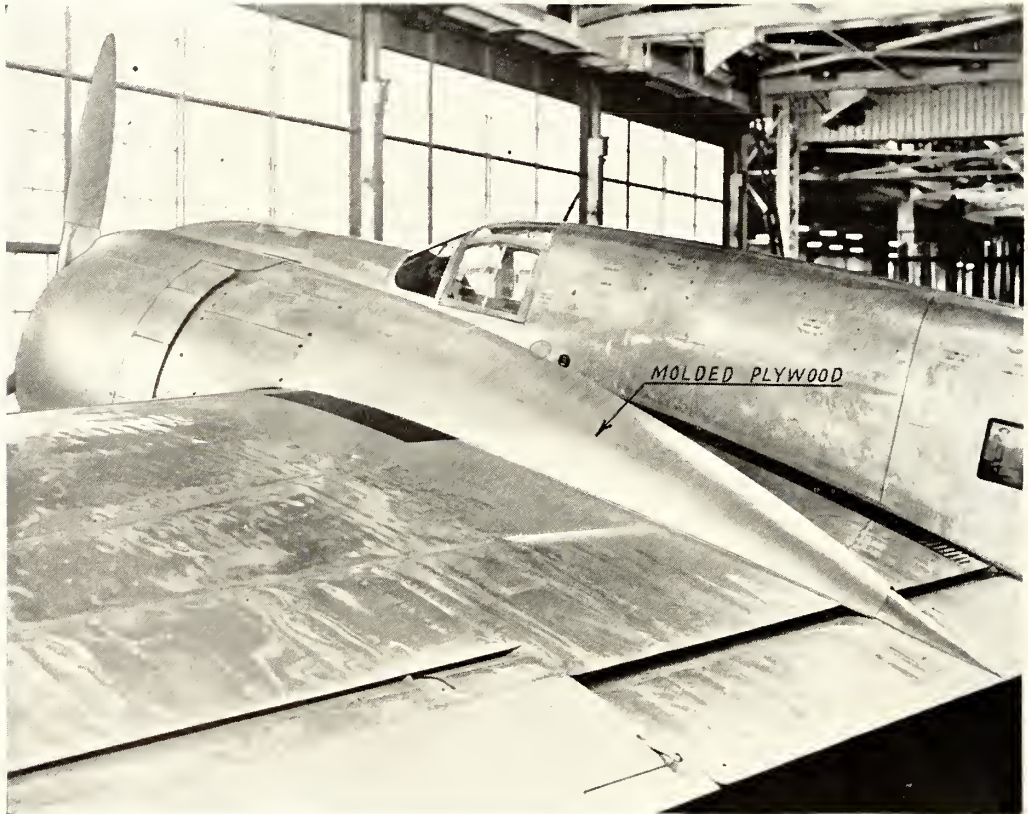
Rear section of engine cowling of molded plywood. Note smooth plywood surface as contrasted with riveted metal wing and fuselage skin.
